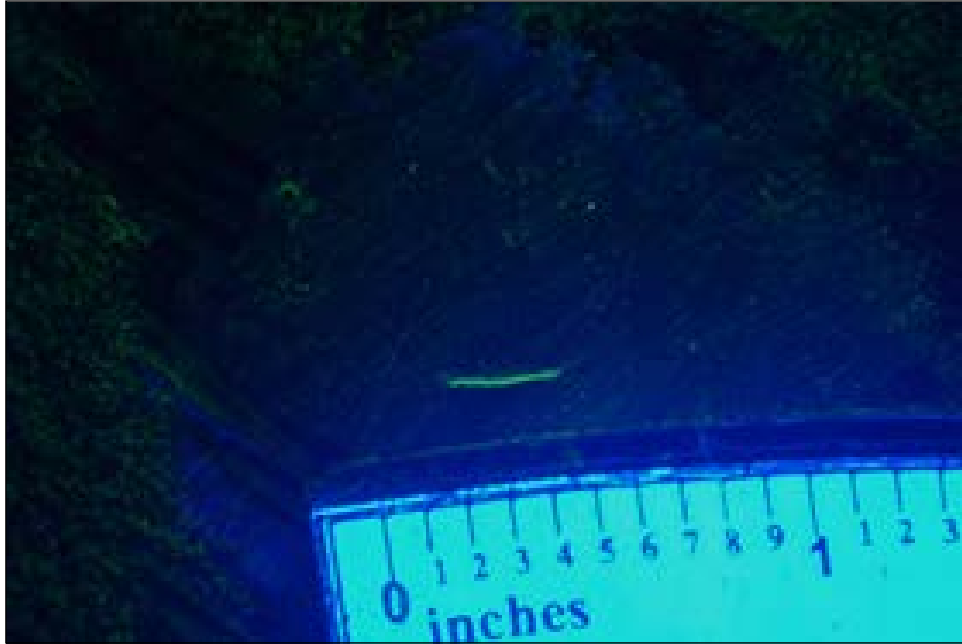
Crack Detected by Magnetic Particle Testing
